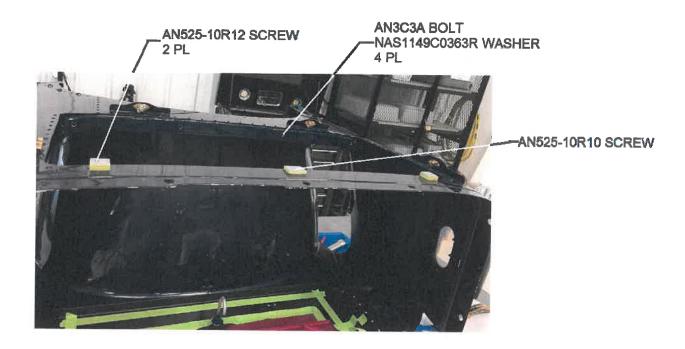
1003-02-100-1 Inlet Barrier Filter Assembly Installation (Filter not shown for clarity)
